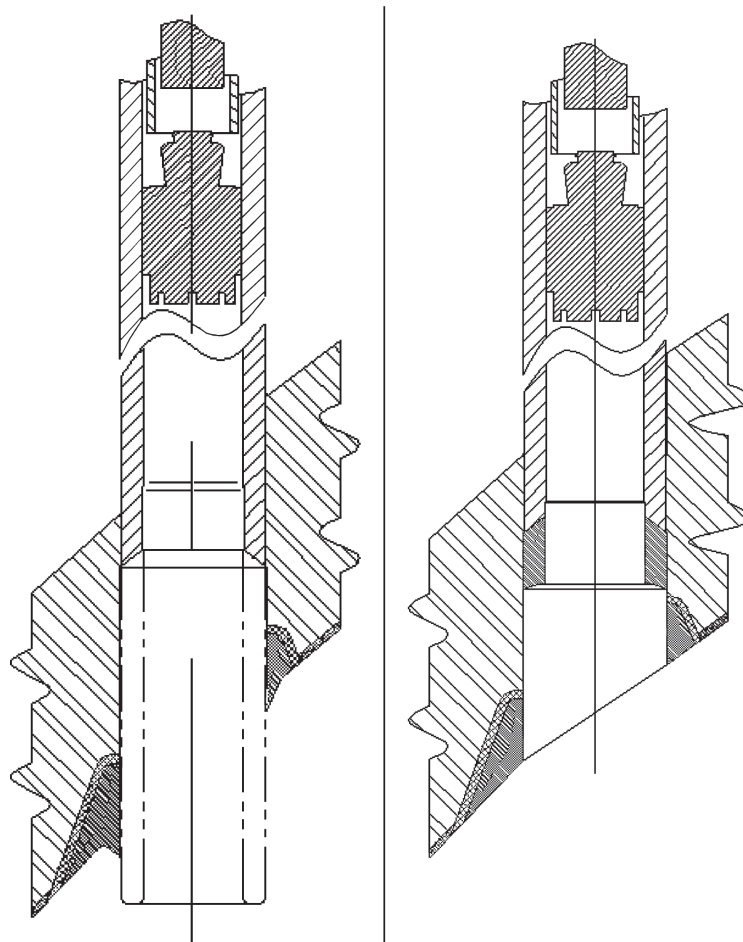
SCHEMATIC OF RPV TOP-HEAD NOZZLE WELD REPLACEMENT REPAIR
